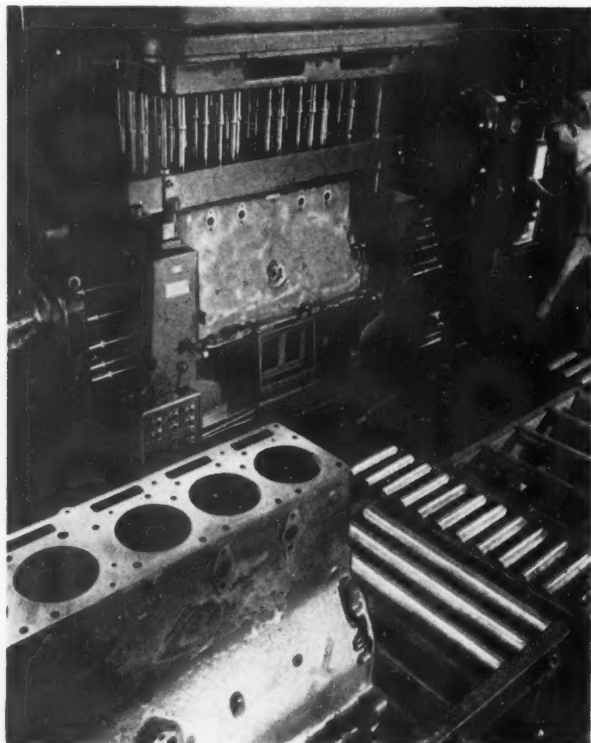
Using Natco Three - Way Multiple Drilling Machine to Drill All Holes in Top, Front and Rear Sides of Cylinder Block. Machine is Entirely Automatic
